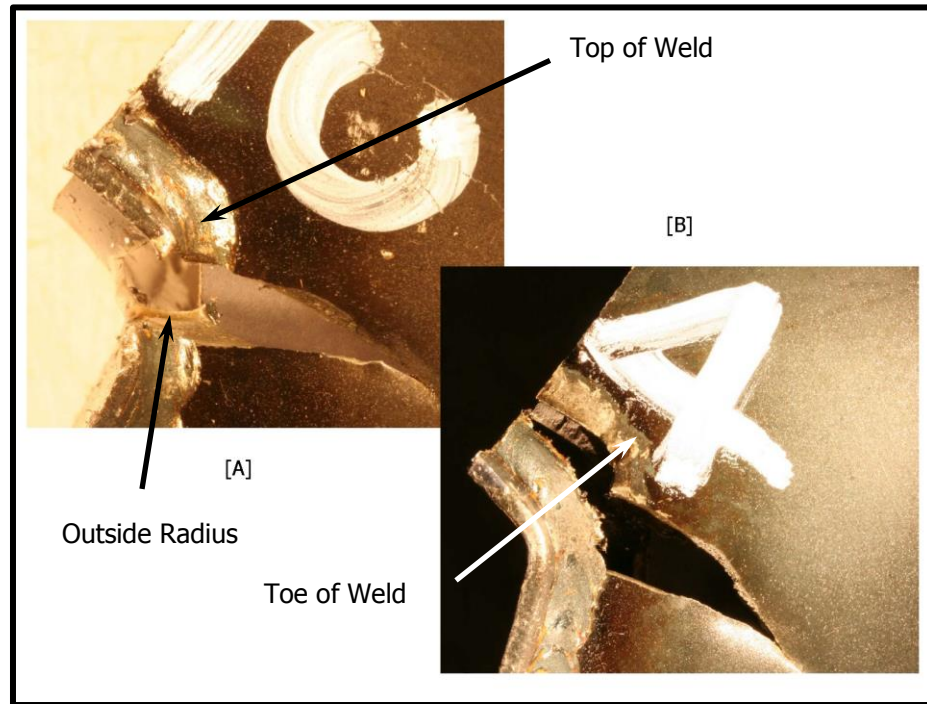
Fatigue cracks at the two locations of crack initiation, [A] 5 bend box, [B] top weld toe.
